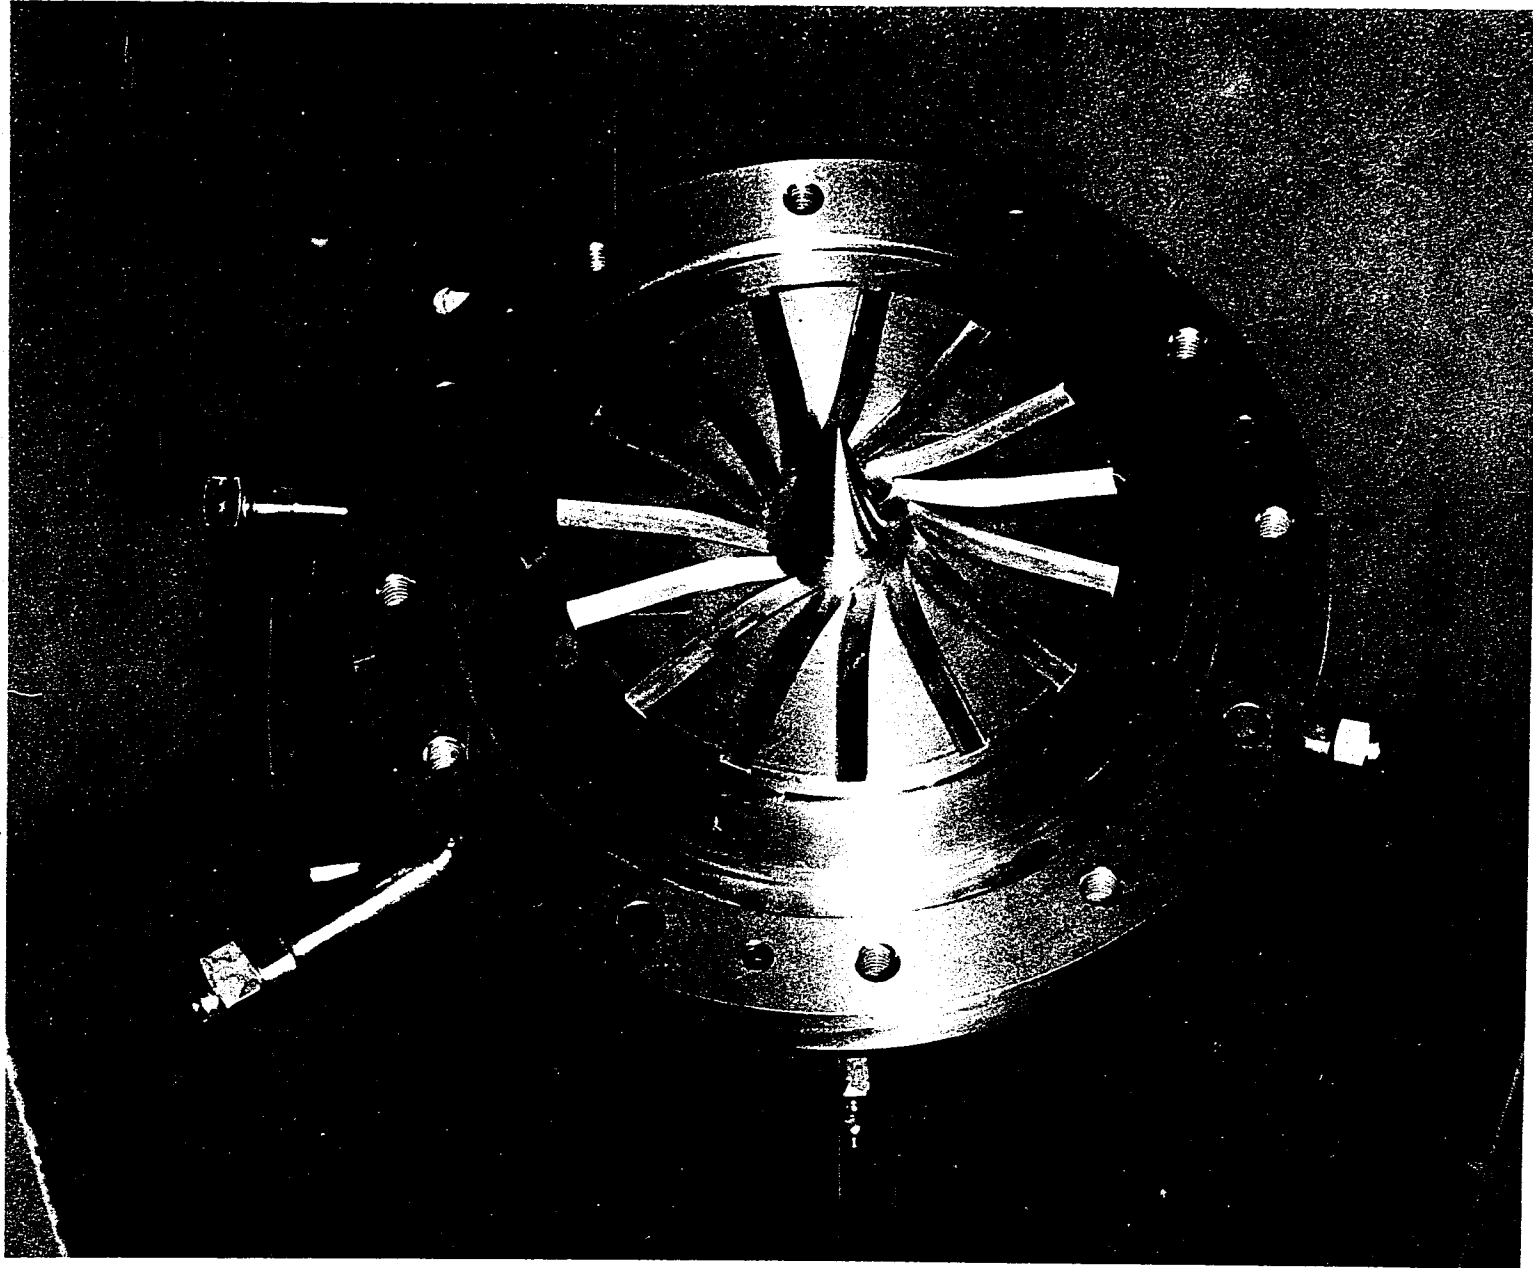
IMPELLER AND NOSE CONE ASSEMBLY
